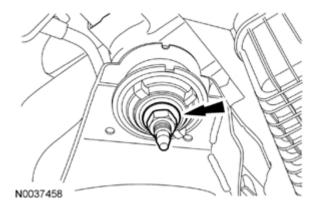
Locating Front Subframe Nut Courtesy of FORD MOTOR CO.
